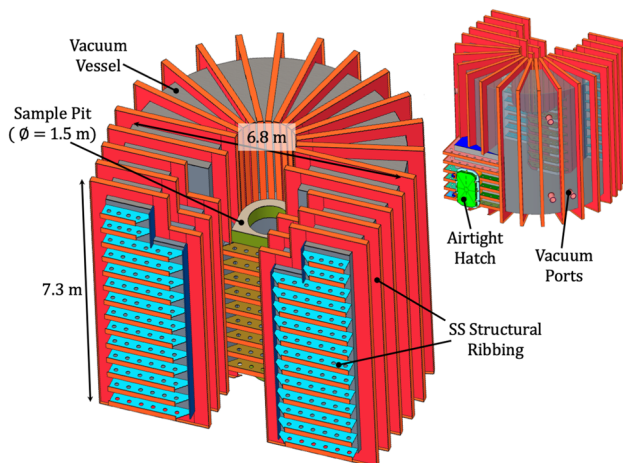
CHES vacuum vessel layout. The vessel itself is cylindrical, 7.3 m tall including the ribbing skeleton with a diameter of 6.8 m. The sample pit, $\text{Ø} = 1.5$ m, is designed to host large sample environments with ancillary equipment. An airtight hatch grants access to the detector tank and seals it. Vacuum ports and trenches for pipes and cables are embedded in the stainless steel ribbing. Radiation shields will be integrated in the design of the structure after neutronics analysis.
